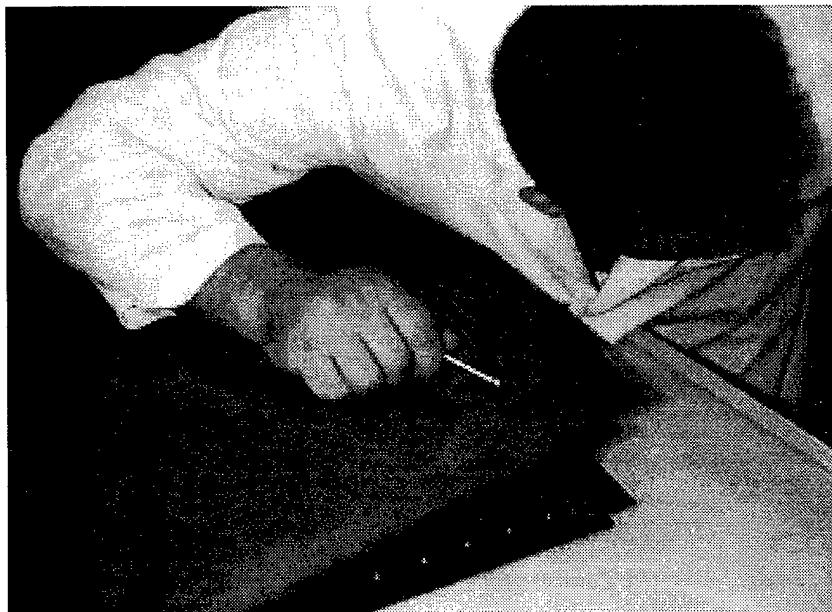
TAP TESTING A COMPOSITE PANEL
